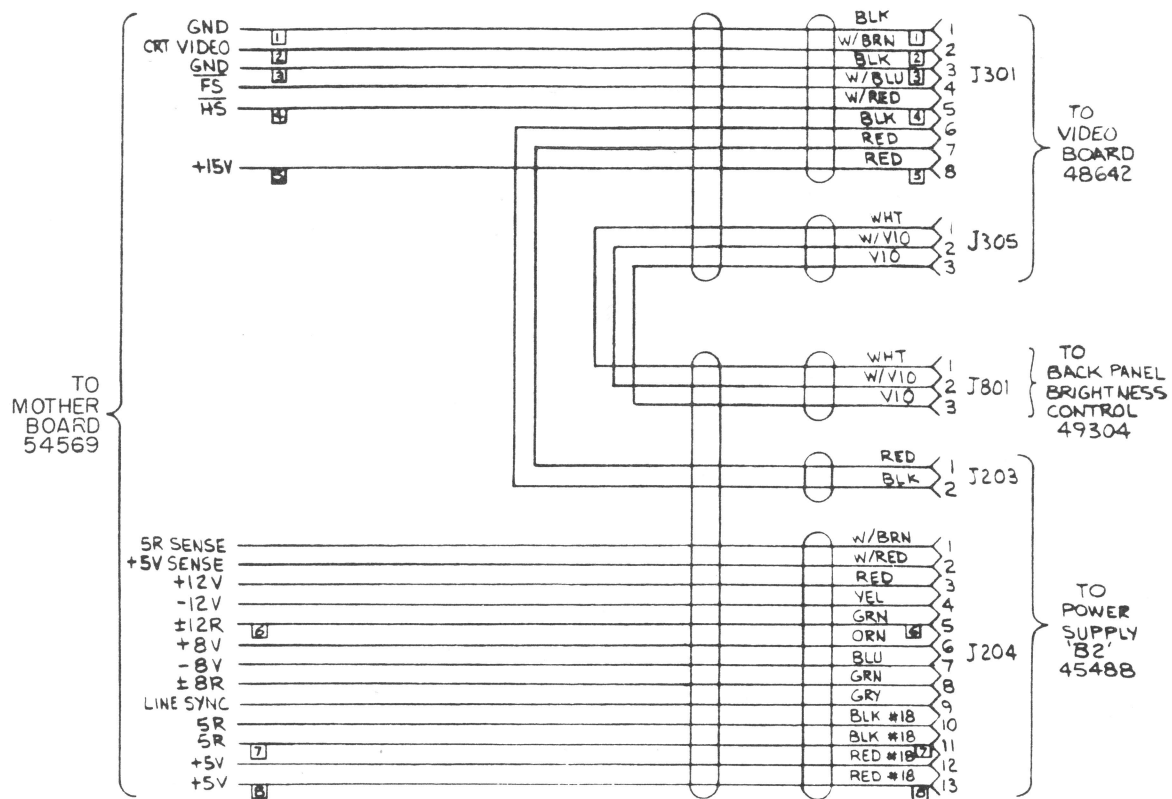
Motherboard-to-Power Supply Interconnect Cable Assembly (P/N 47111)
